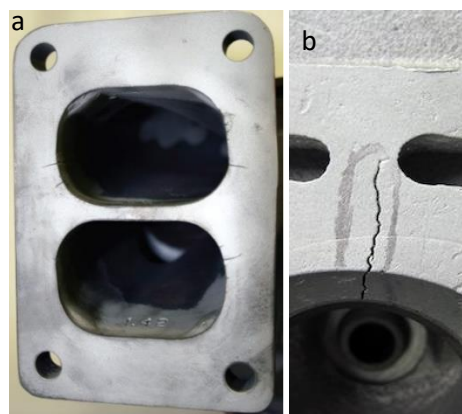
a) TMF crack in a turbine housing B) TMF crack in cylinder head
